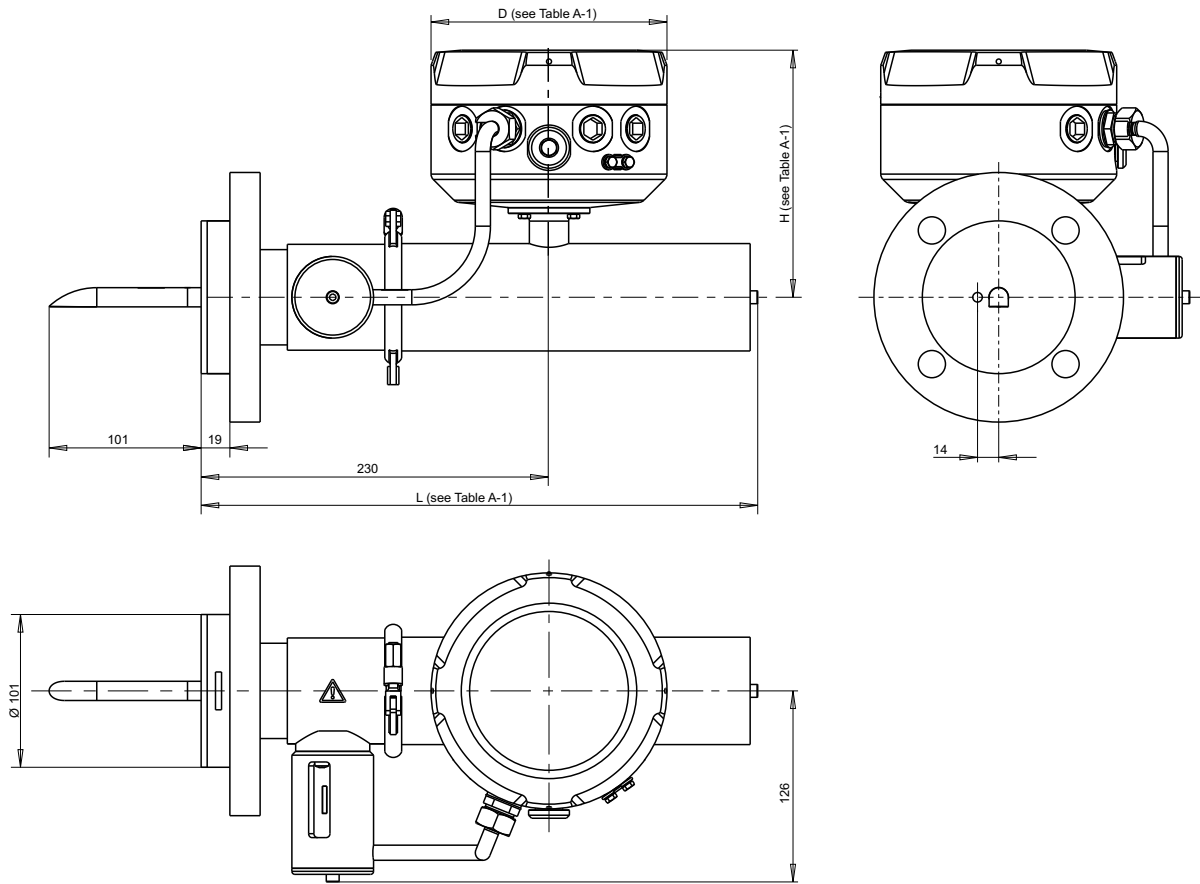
Dimensions of the Inline Pump 300 Ex d with EN 1092-1 or ANSI B16.5 flange and sensor
